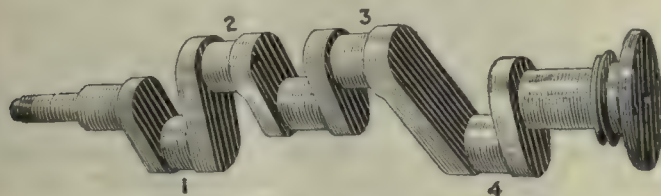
FOUR-CYLINDER CRANKSHAFT
